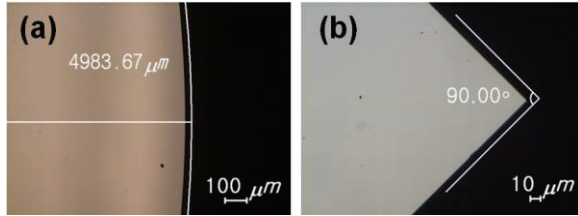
Tool for machining prism pattern on the sinusoidal surface (a) R 5mm (b) V90°
